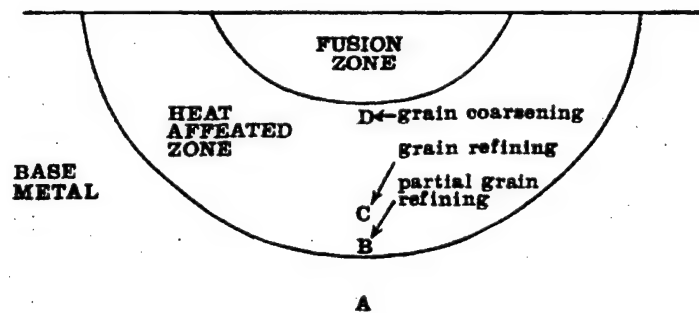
A sketch of a typical single pass, steel weld from [Ref. 1].
